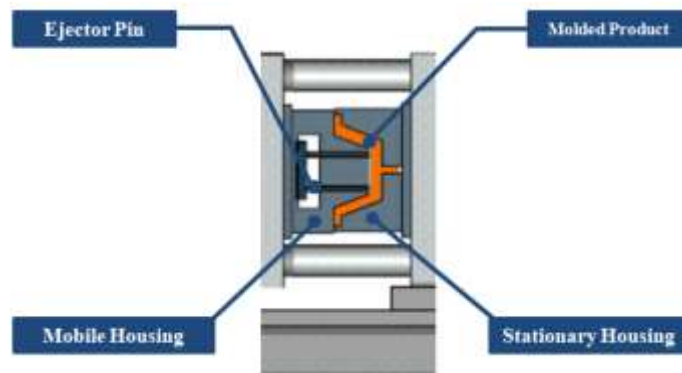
Molding Unit / Ejecting Unit [W1]
